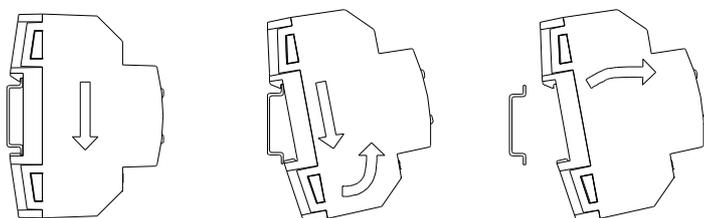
MAXinBOX FANCOIL 4CH2P DIN-rail assembly
